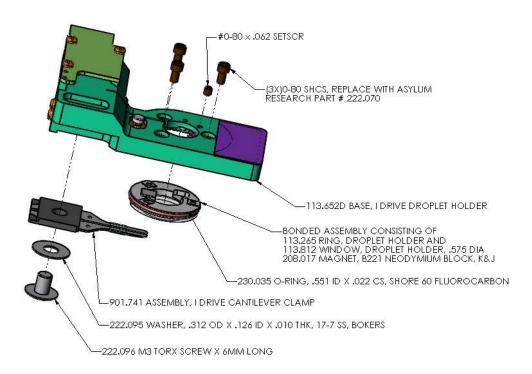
Droplet Cantilever Holder Assembly exploded view
